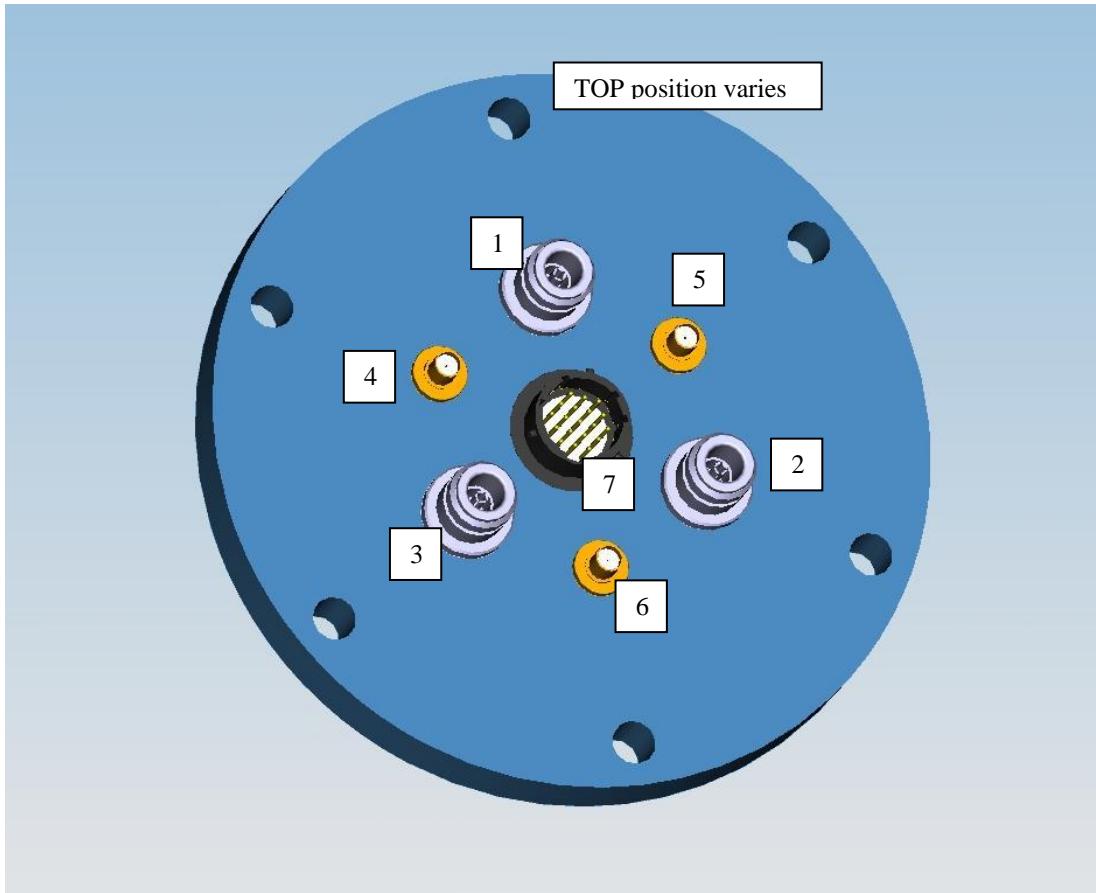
Feed Through Arrangement for Flange B, Cavities 1 – 7.
